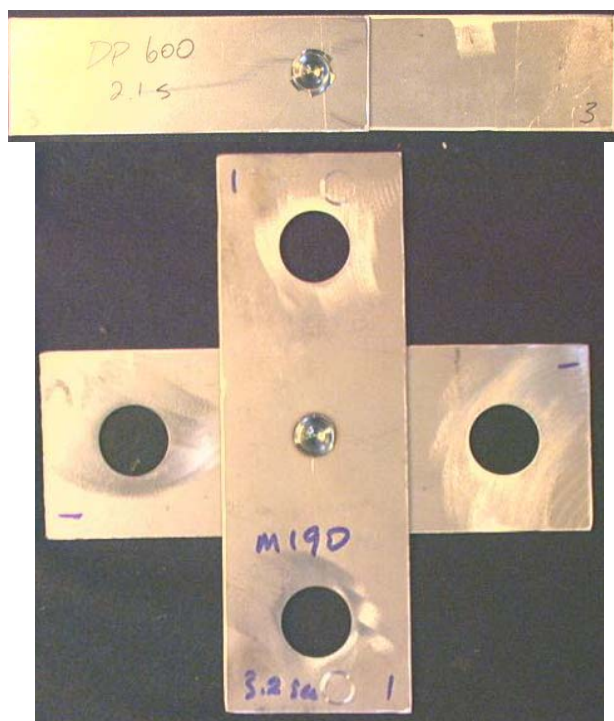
Appearances of the tensile shear and the cross-tension welded coupons. The welds were at the center of the overlapping region.
